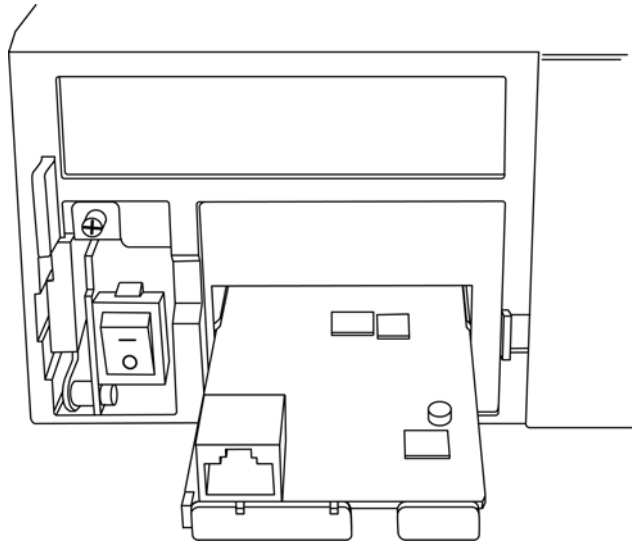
Installing PZ-BS11 Blade in Expansion Chassis
